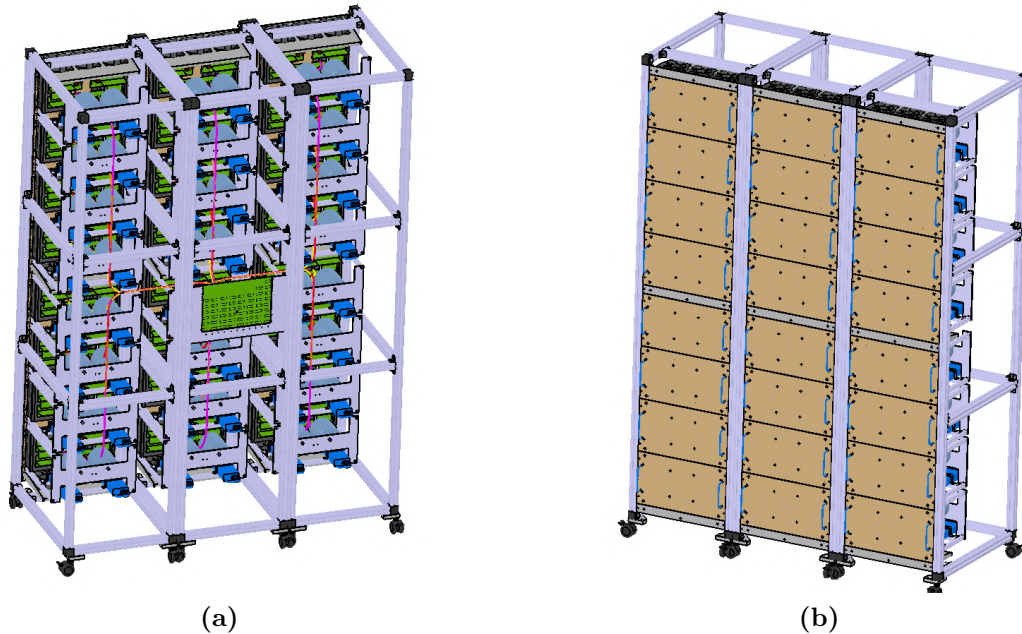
Project of the racks for the multilevel converter: (a) back view and (b) front view.
